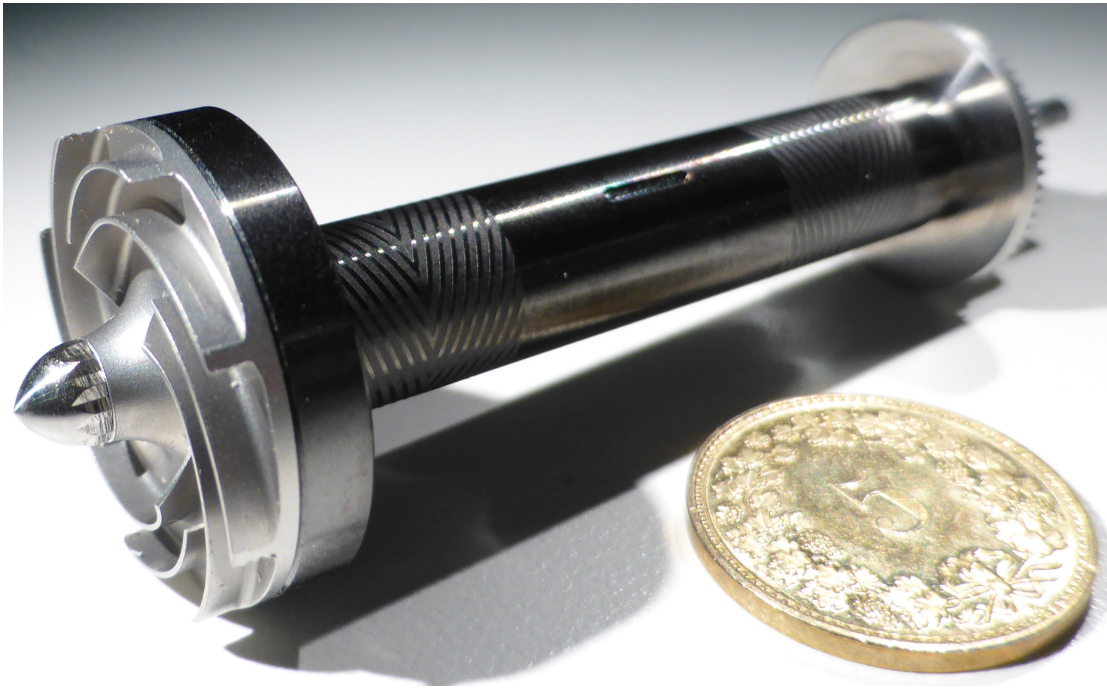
Side view of the radial anode off-gas recirculation fan with mounted spinner (left), the diamond-like carbon (DLC) coated shaft with an 8 mm diameter featuring two herringbone-grooved journal bearings, and the radial-inflow turbine (right). The Swiss five centime coin diameter is 17.15 mm.
